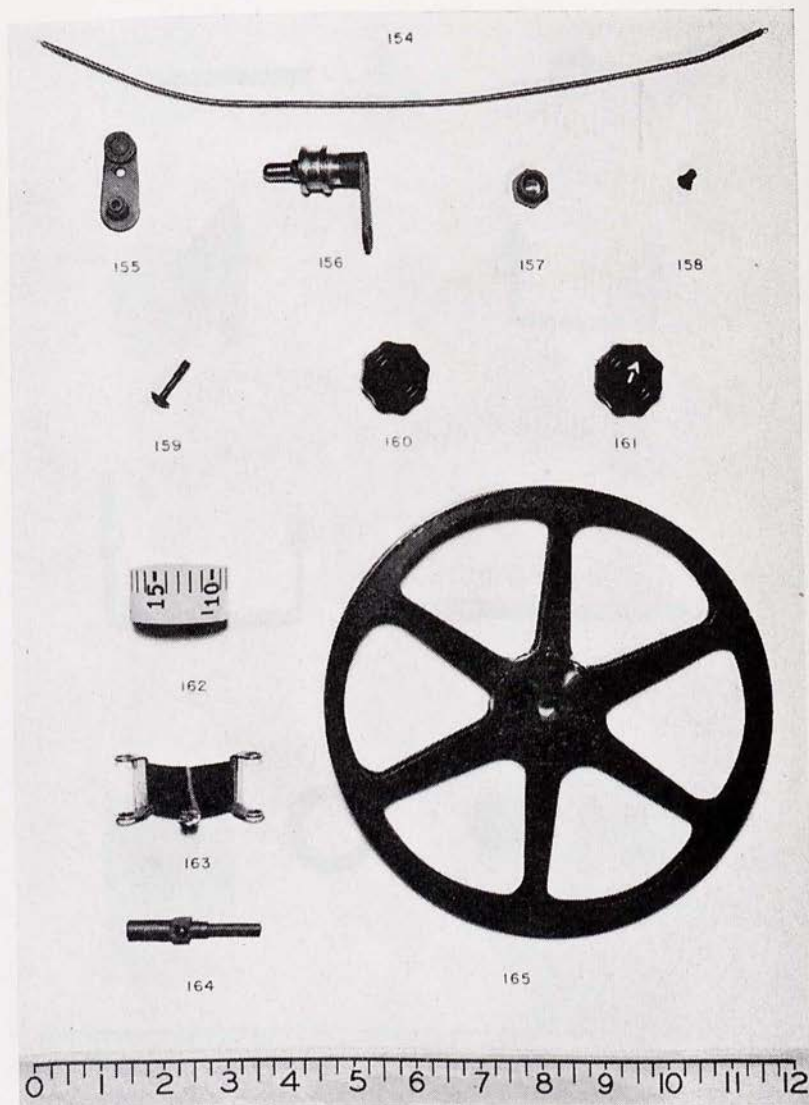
Keyer TG-34-A, replaceable parts 154 to 165.
